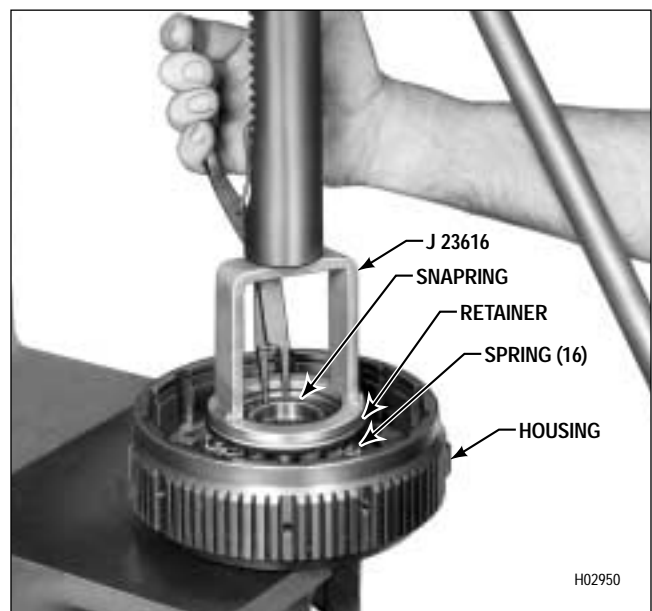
Removing (or Installing) Fourth Clutch Spring Retainer Snapping
